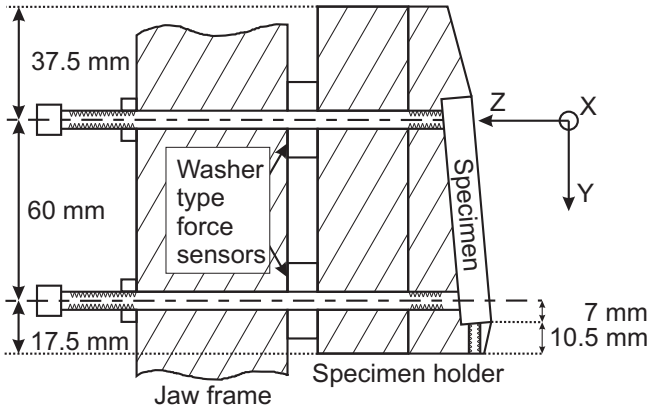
A schematic illustration of the attachment of the force sensor and the specimen holder with two screws holding a 15 kN pretension each. Two smaller screws going through the bottom of the specimen holder keep the specimen in place during the test.
